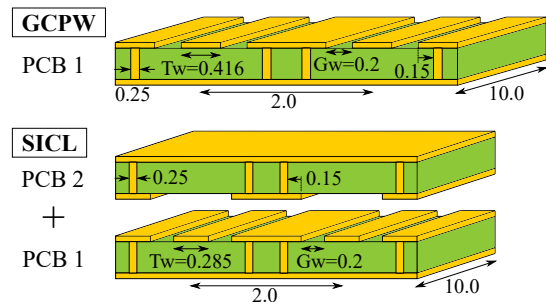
(top) Layout with dimensions indicated in millimeter of two parallel GCPW lines, consisting solely of PCB 1 and (bottom) two self-shielded SICL lines by assembling PCB 1 and PCB 2.
